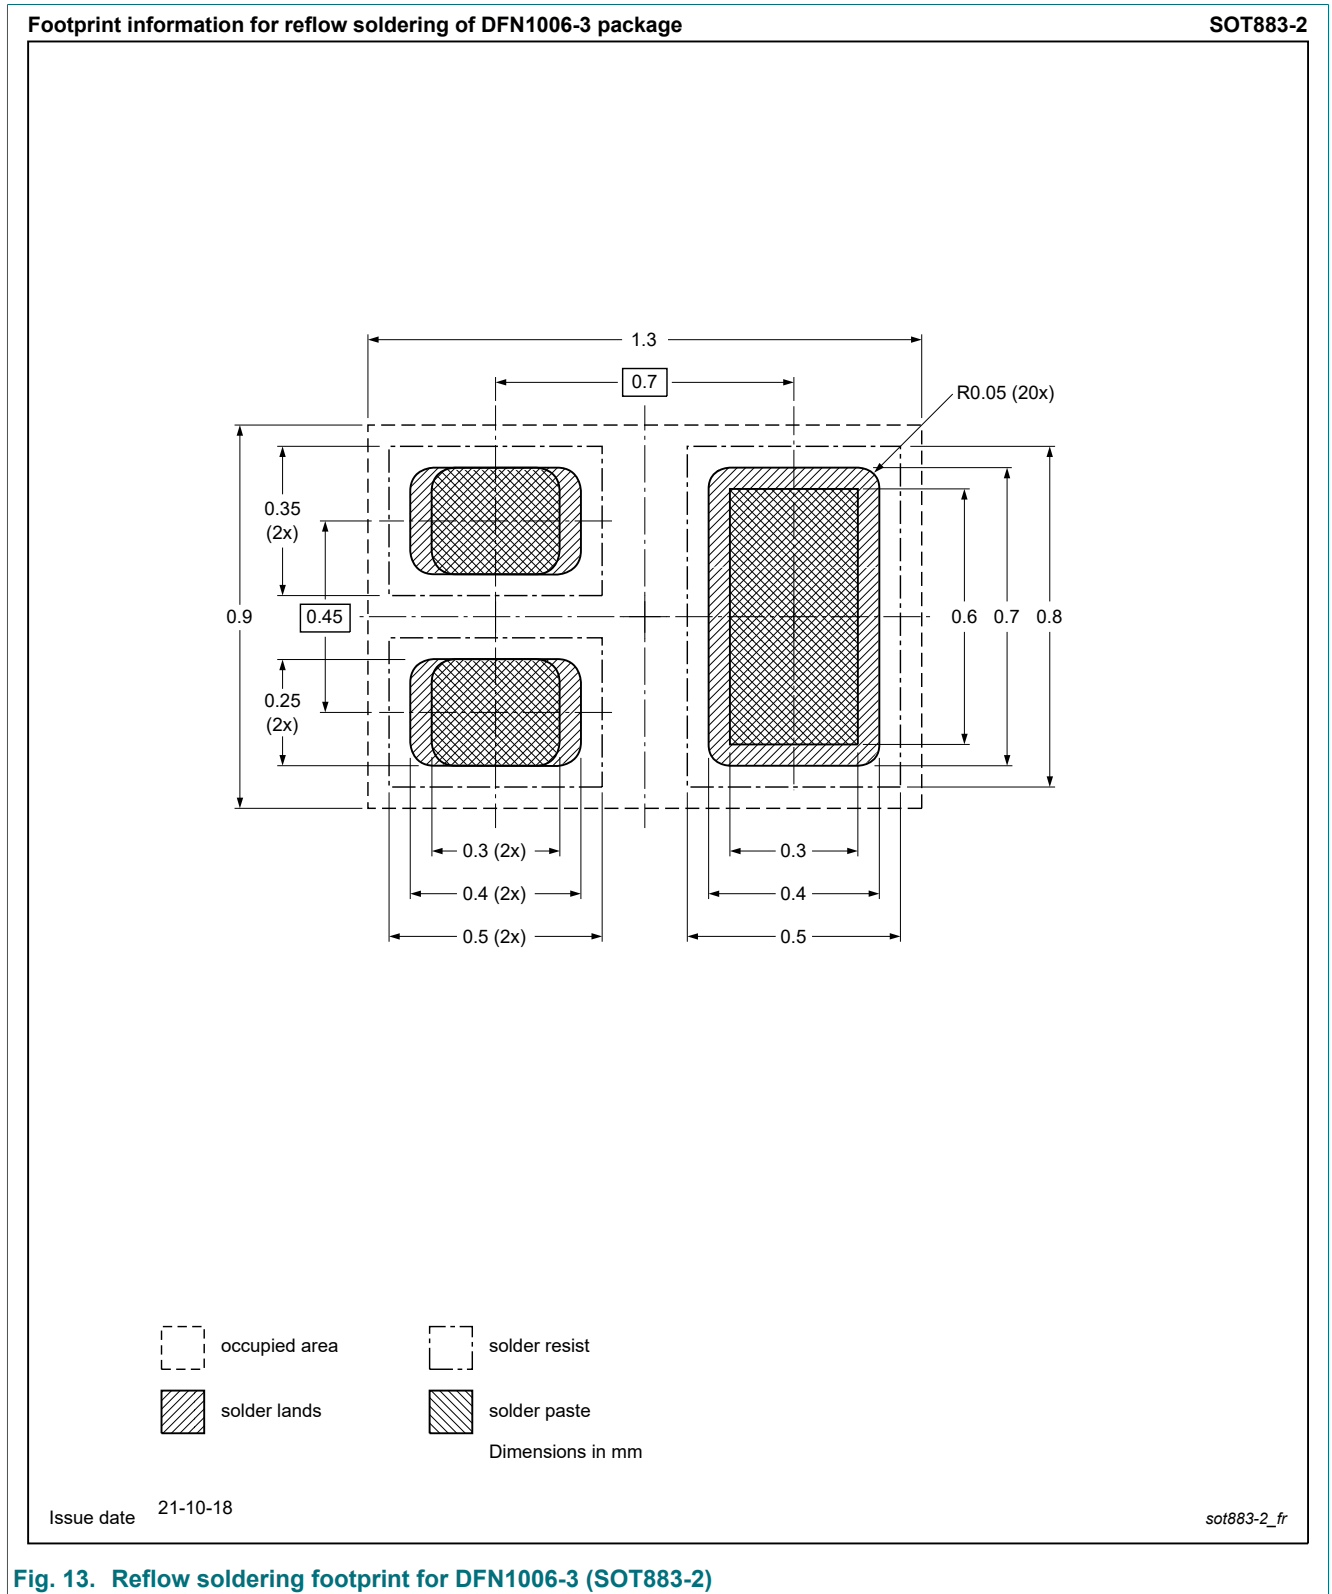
Reflow soldering footprint for DFN1006-3 (SOT883-2)
